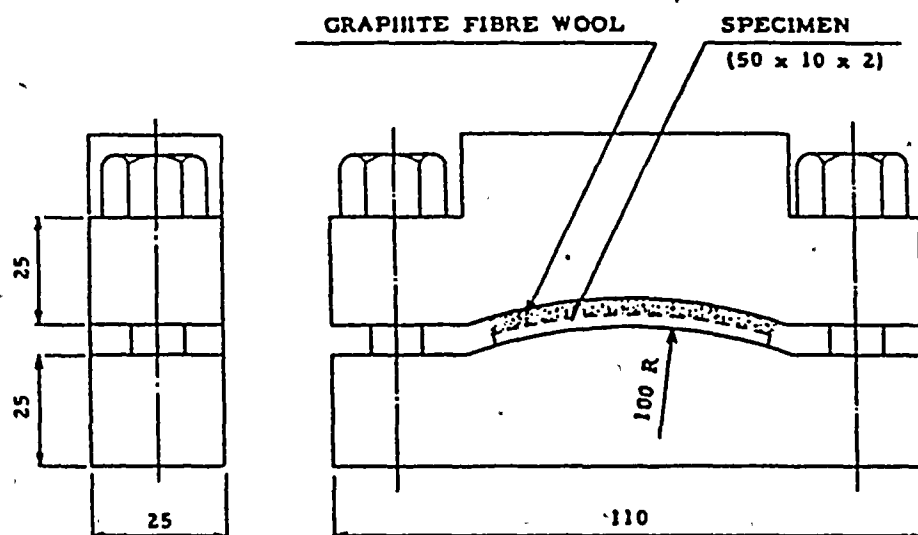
Assembly of Creviced Bent Beam Test Jigs
